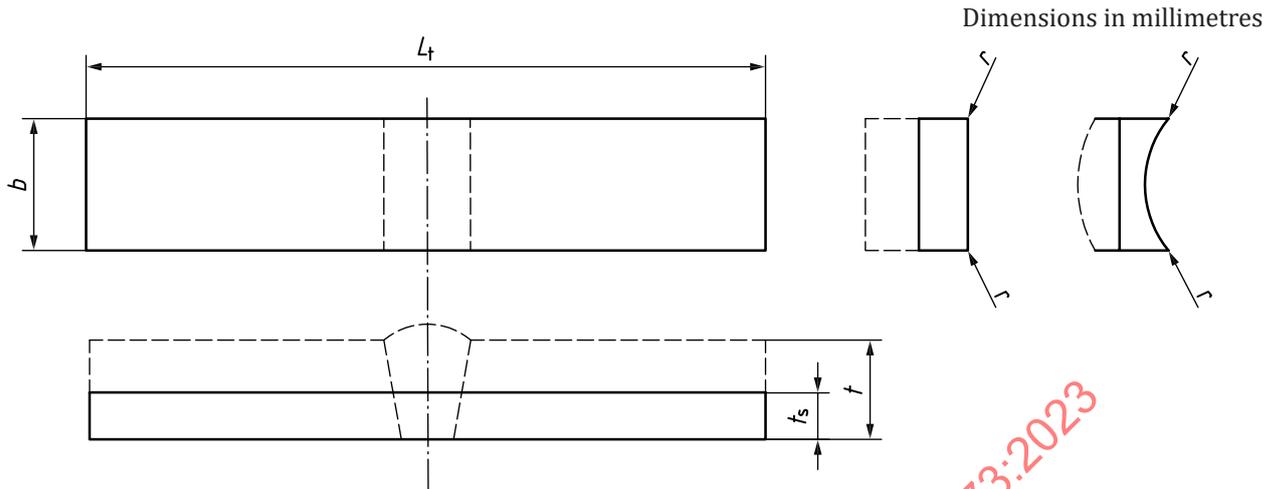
Transverse face bend test specimen for a butt weld (TFBB)
